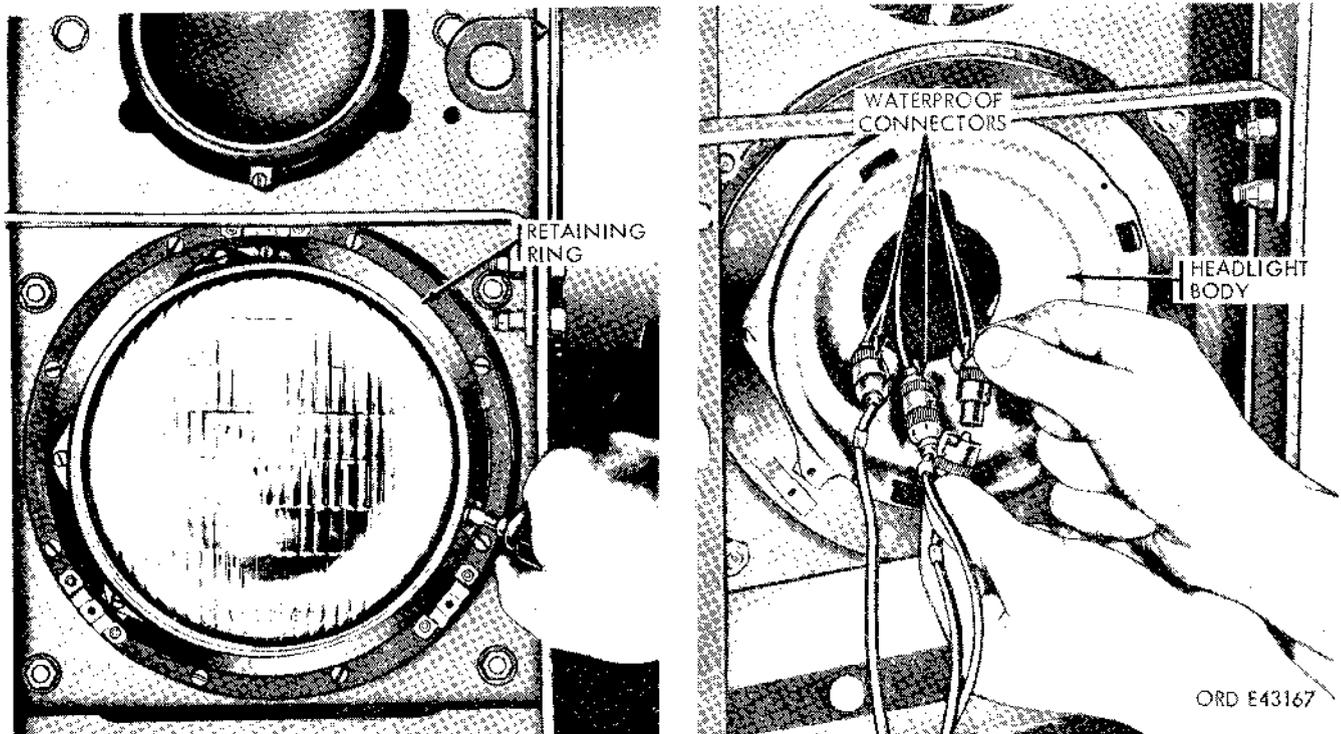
Removing headlight retaining ring and sealed-beam lamp unit.
